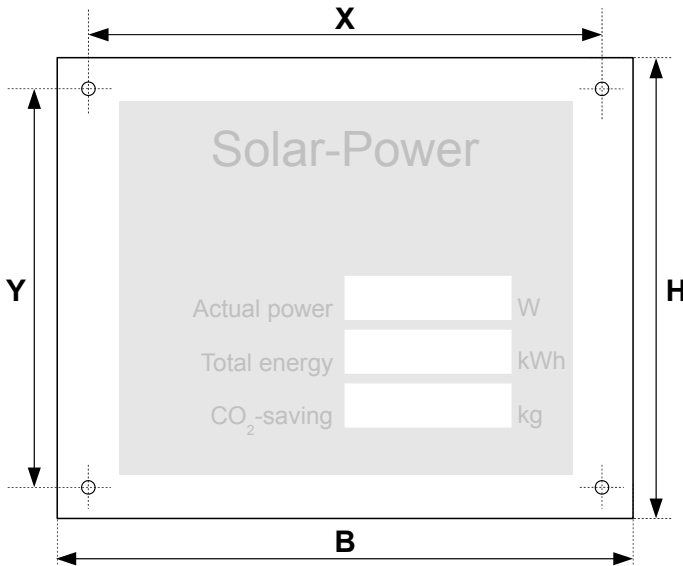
Outside dimensions and drilling dimensions, glass displays
